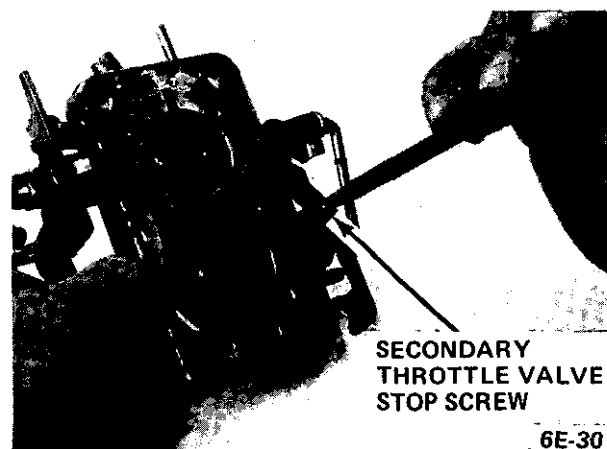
E-30 Adjusting Secondary Throttle Valve Gap
